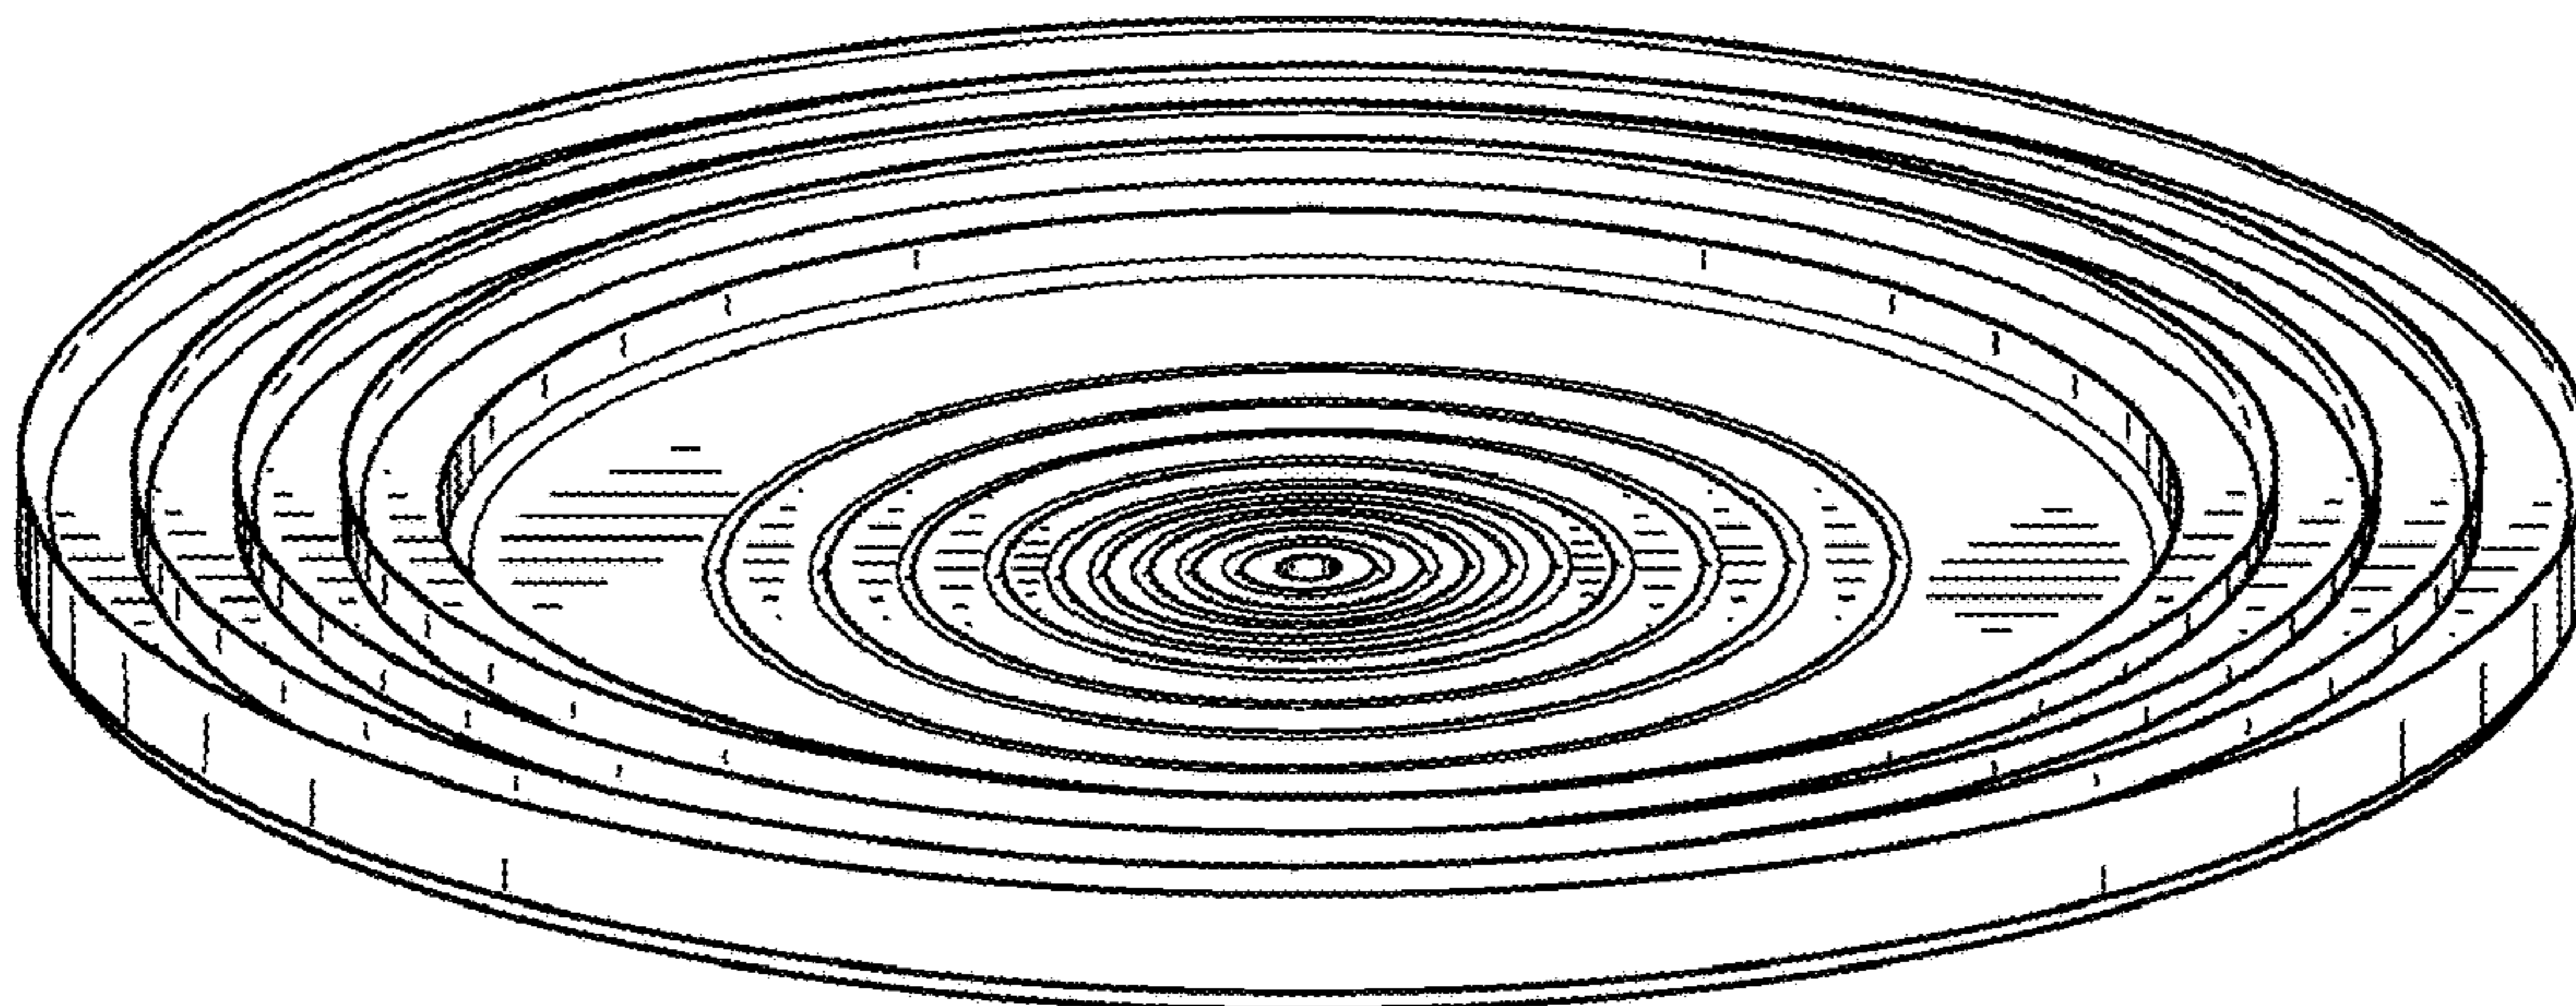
is a top, front perspective view of a sealing gland showing our new design;
